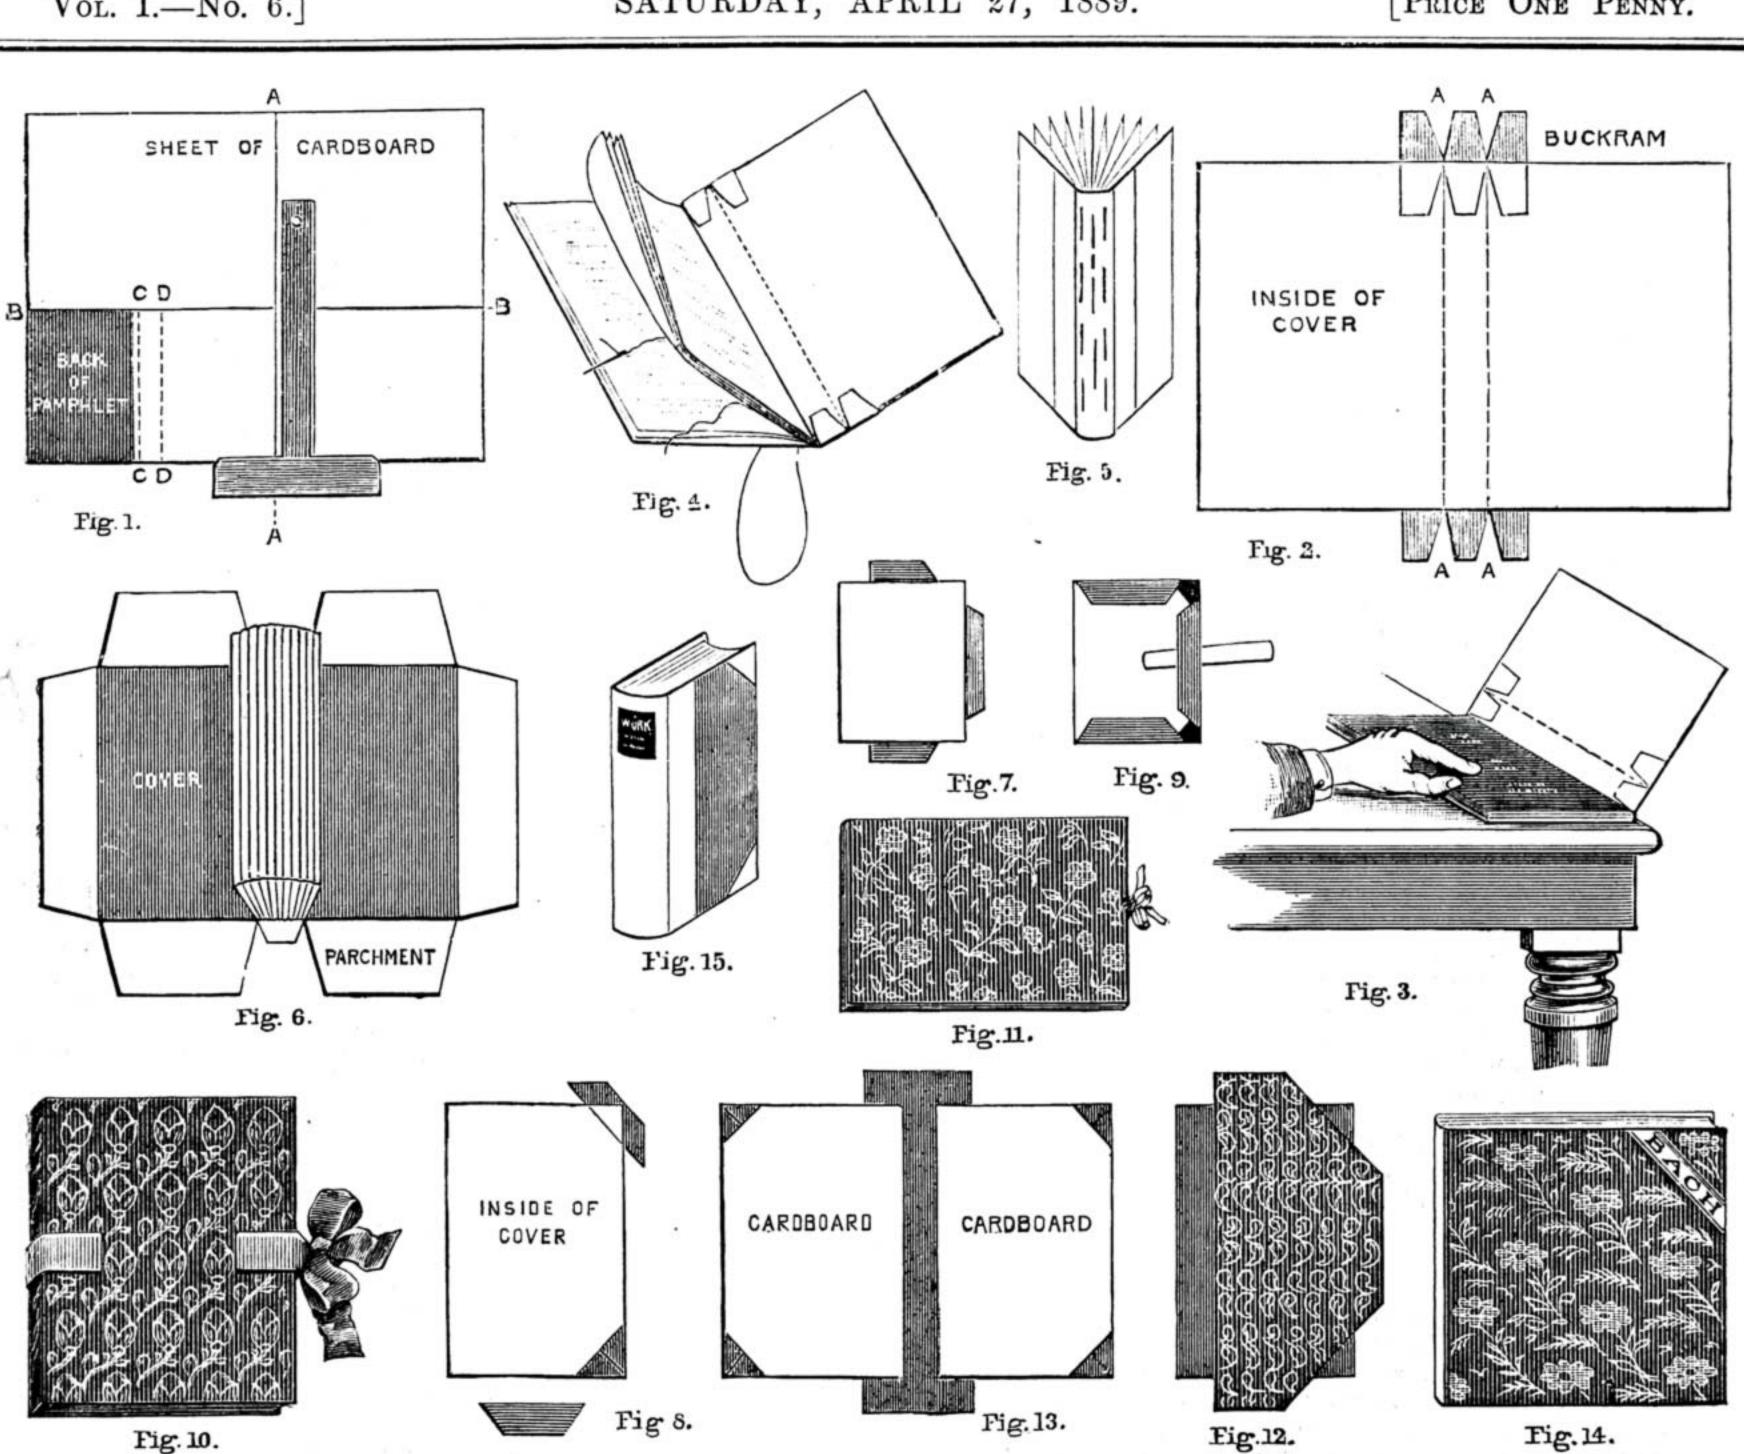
Marking Size of Pamphlet on Card. Fig. 2.—Buckram on Back of Cover. Fig. 3.—Fitting Pamphlet to Cover. Fig. 4.—Tying Thread and Stitching. Fig. 5.—Back after Stitching. Fig. 6.—Loose Cover of Vegetable Parchment. Fig. 7.—Cutting Paper for Sides. Fig. 8.—Pasting Down Corners. Fig. 9.—Paper Pasted Down and Ribbon Inserted. Fig. 10.—Ribbon Carried Round Back. Fig. 11.—Book Complete and Tied Up. Fig. 12. -Book Covered with Cretonne. Fig. 13.—Cover laid on Strip for Back. Fig. 14.—Book Labelled with Author's Name. Fig. 15.—Lettering on Back.
